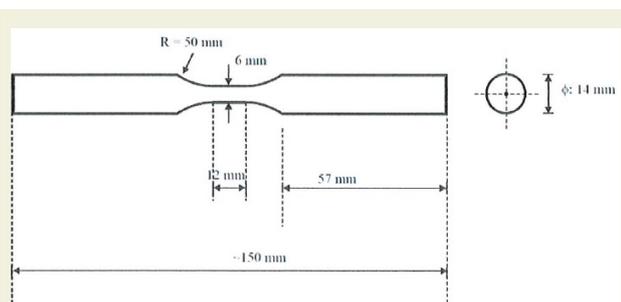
Dimensions of Döktaş Fatigue specimens acc.to ASTM E466
